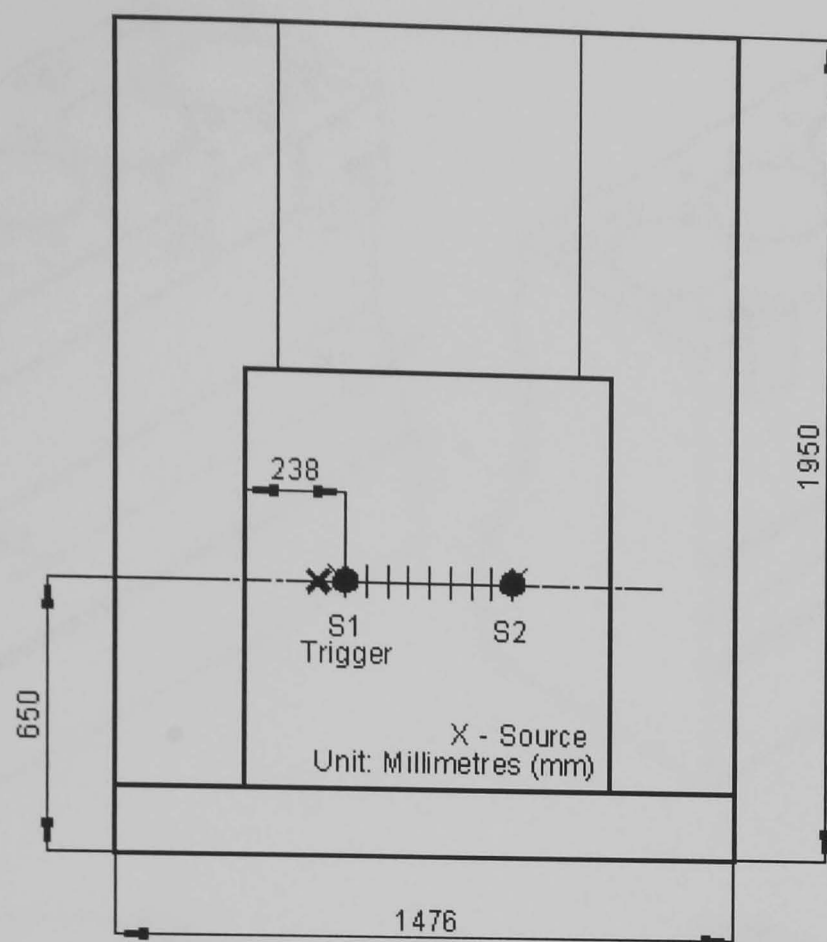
Dimensions of the flat panel of a large marine diesel engine and source-sensor positions
